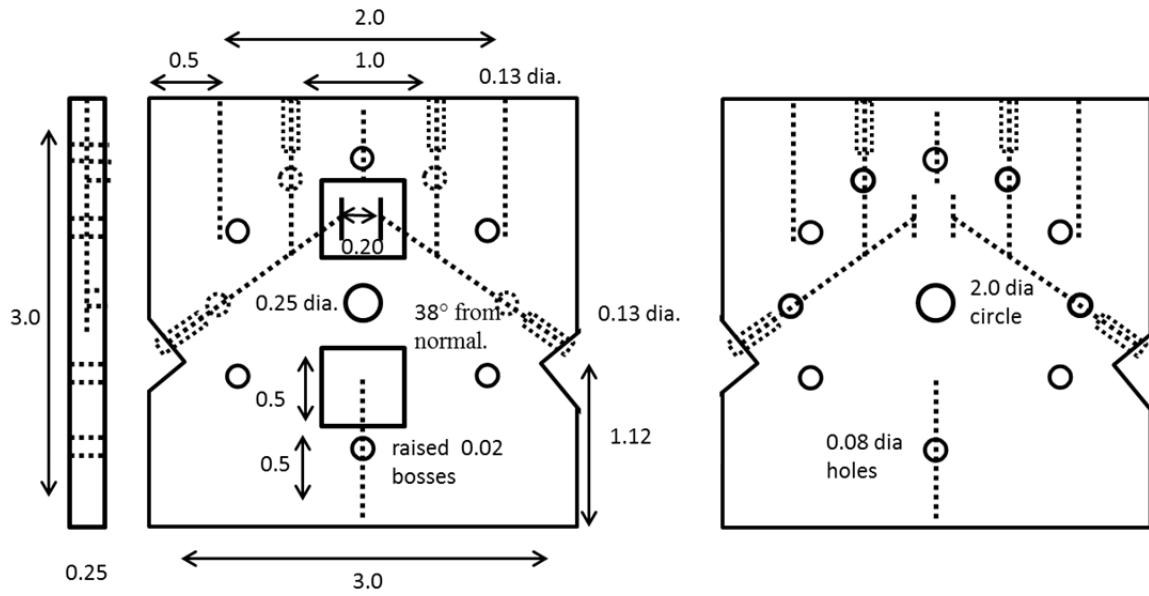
Mechanical drawing of print head carrier plate. The plate features integrated channels and is made of Kovar®. Dimensions are in inches. Drillings into the front surface of the plate are arranged in a 2 in diameter clock face around a central through hole for the optical sensor. The even numbered positions are countersunk through holes to slip fit #2 screws. The 1, 3, 9, and 11 o'clock positions are bored 0.13 in into the plate to form vias that connect organic vapor sources to the channels bored into the sides of the plate. Channels are 0.08 in in diameter with 0.13 in entrances that can be sealed with 0.125 in diameter stainless steel dowel pins. Other drillings into sides of the plate accommodate heaters and thermocouples. These should be 0.13 in diameter. The angle of the diagonal channels should be chosen to connect the 3 and 9 o'clock inlets to the centers of the nozzle membrane feed trenches. The nozzle membrane is mounted on a 0.5 in square boss raised 0.02 in above the surface of the plate to facilitate lapping and polishing. A second boss is machined into the other side for symmetry while lapping and bonding.
